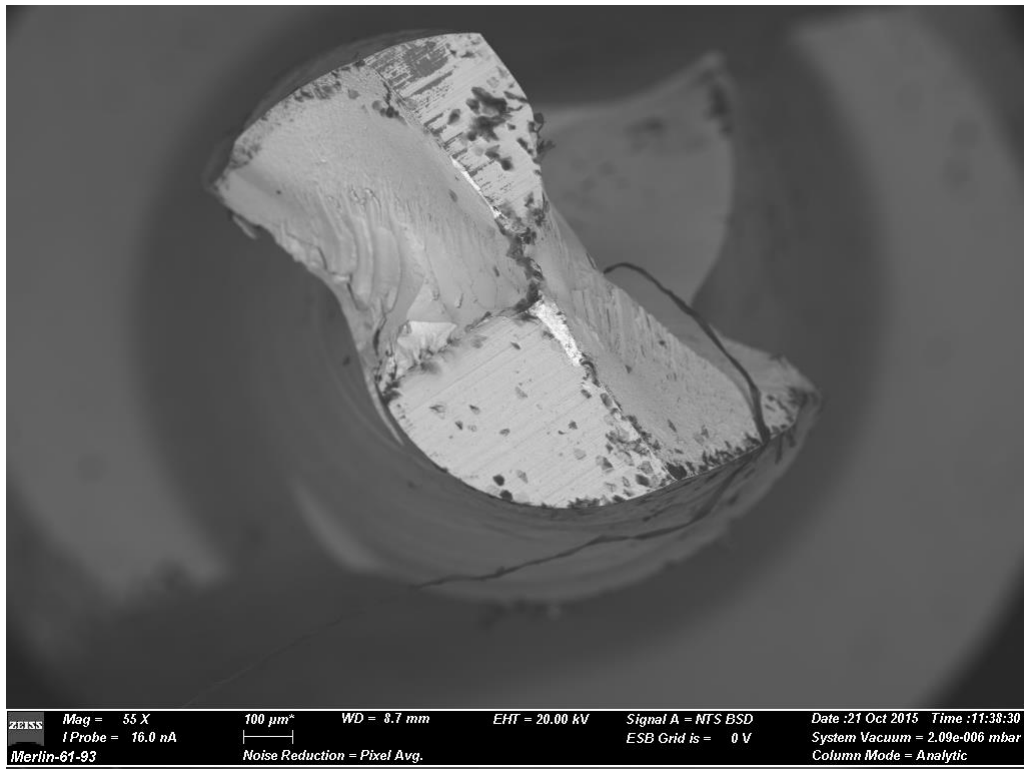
Experimental run 6: Tungsten carbide tool after machining with parameters $v_c=80.11$ [m/min], $v_f=694.7$ [mm/min] and $a_p=106.42$ [μm]
